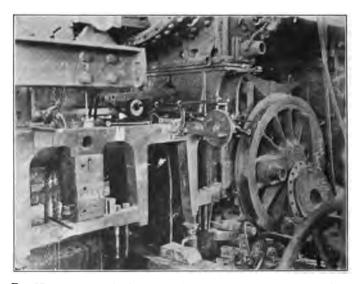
A power hack saw used in cutting frame before welding.
